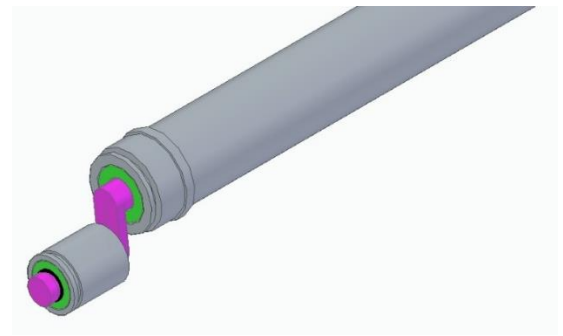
A screenshot of the assembly of the rotary and pitching shaft.
